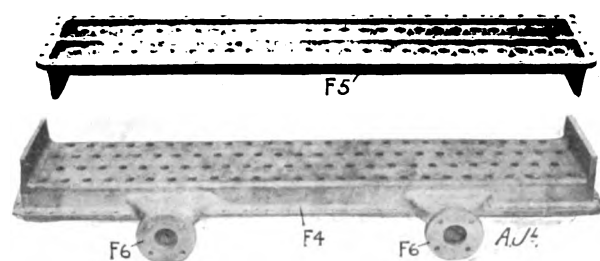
Top and bottom header castings for a Clarkson condenser.
